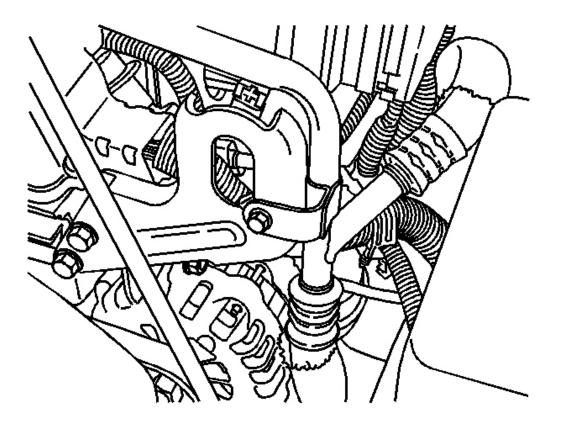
View Of Engine Lift Hook & A/C Bracket Bolt Courtesy of GENERAL MOTORS CORP.
